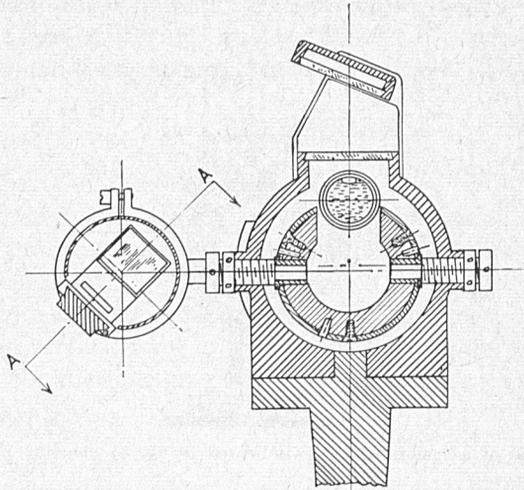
Section of assembly at B-B (indicated in fig. 3) showing pivot-mounting of telescope.
